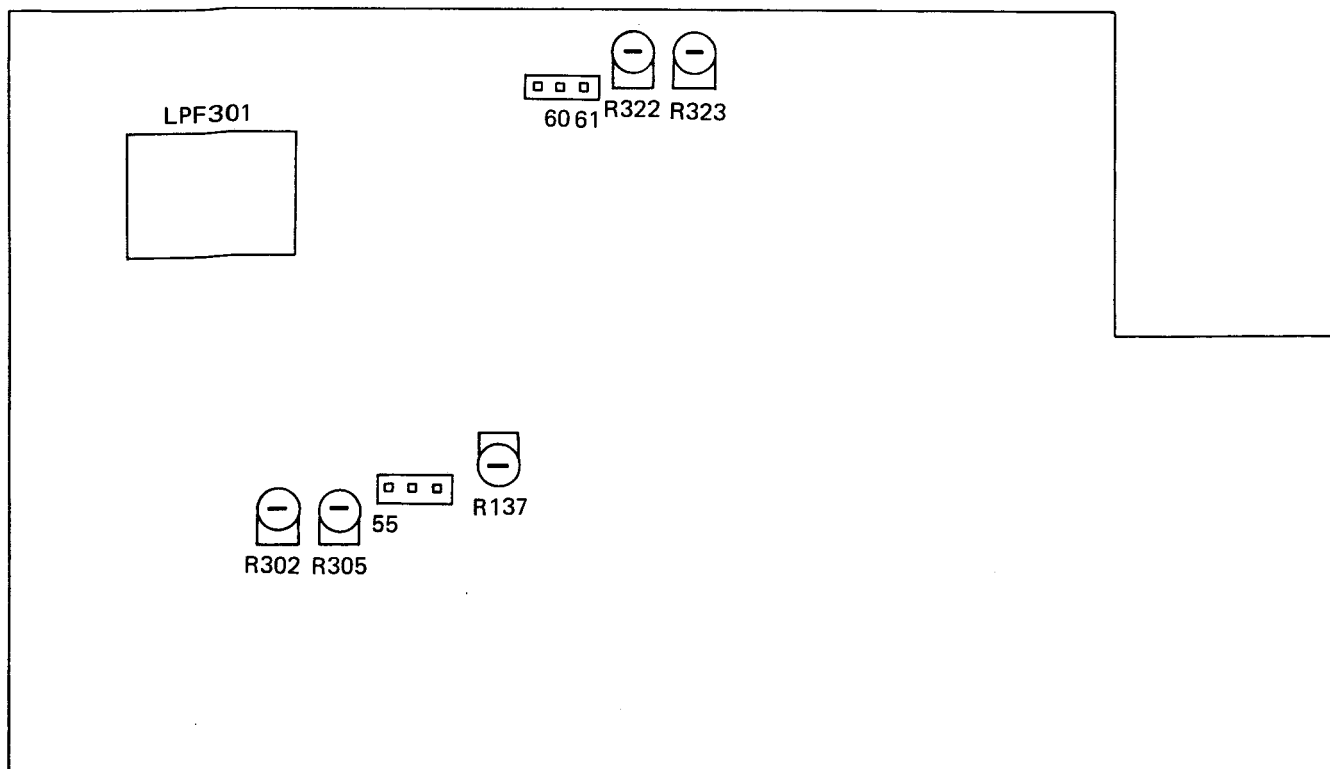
MPX/REGULATOR CIRCUIT BOARD (TOP VIEW)
